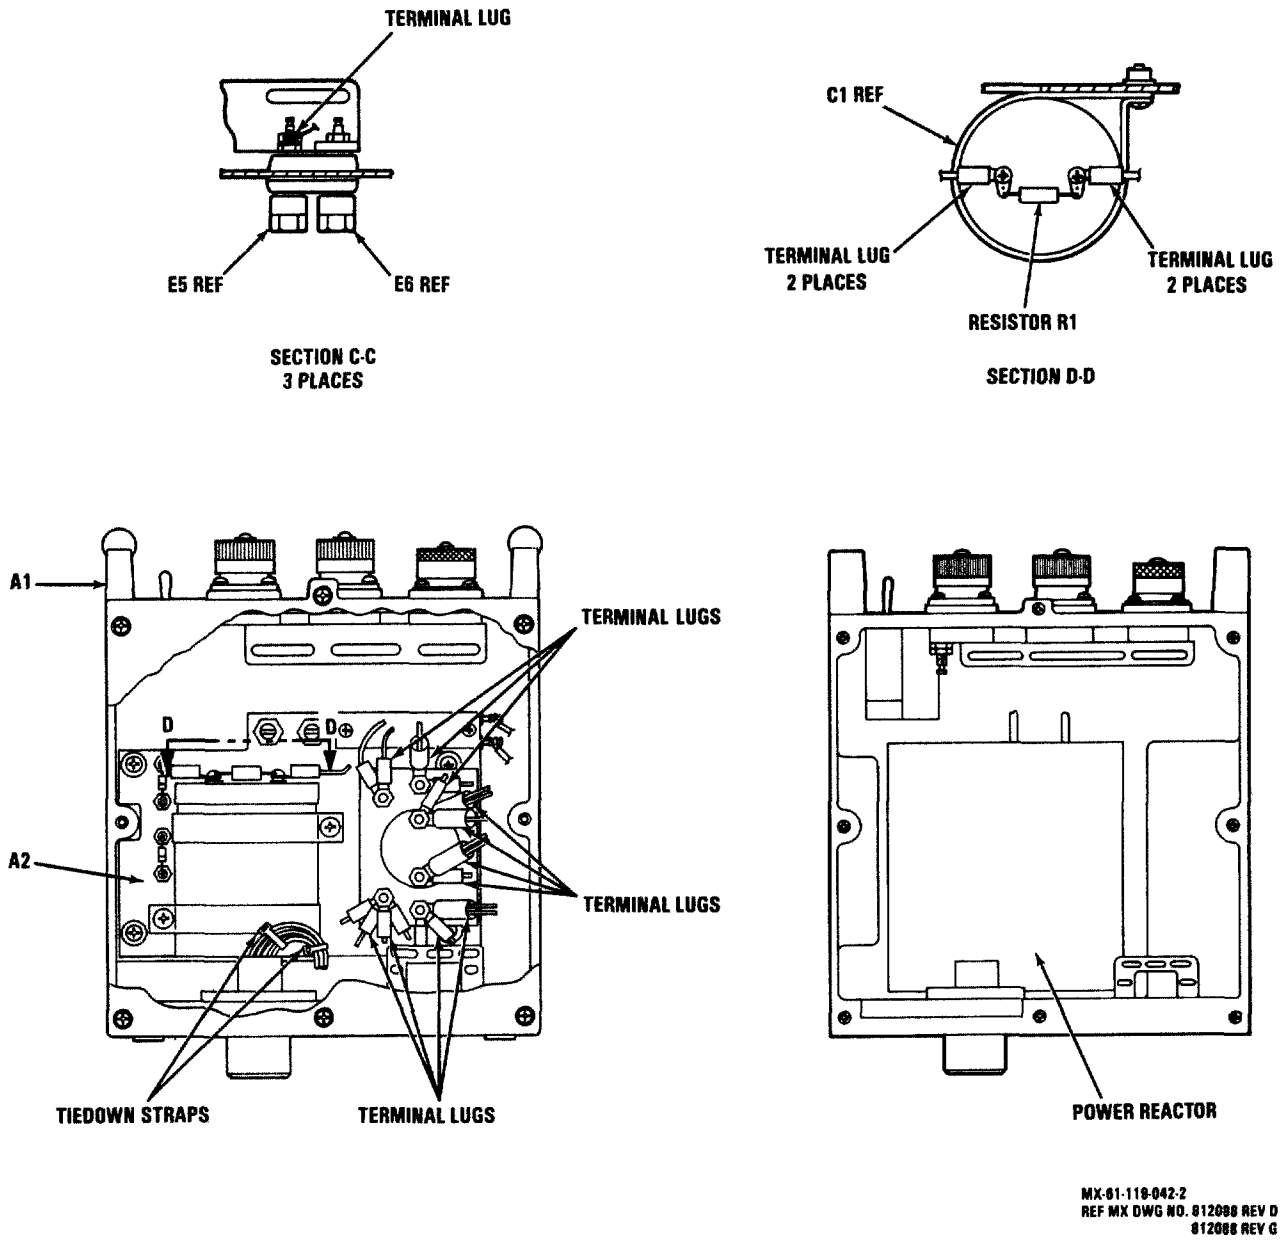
PDU Electrical Equipment Chassis 2 Component Location (Sheet 2 of 2)
